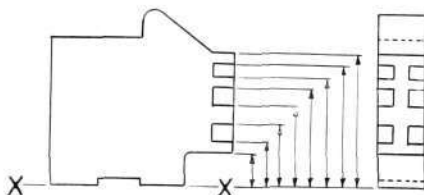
A—Dimensions of Steps to be Checked by method shown in Fig. 2
